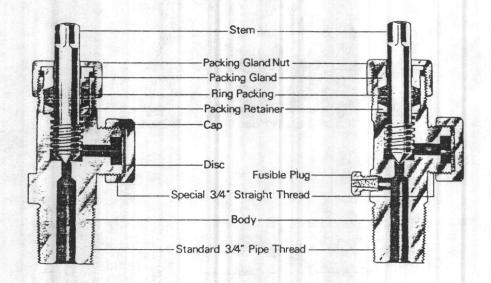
Comparison of ton tank valve with cylinder valve (Courtesy of PPG Industries)
